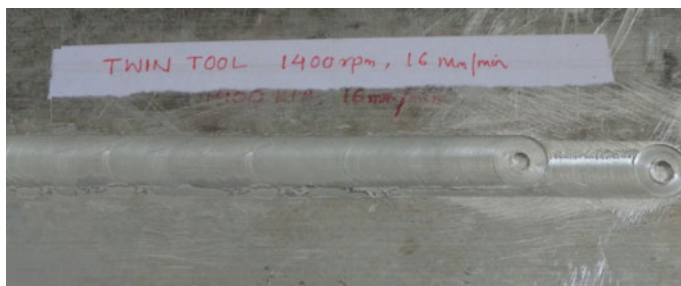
Welded surface appearance using twin tool set up
